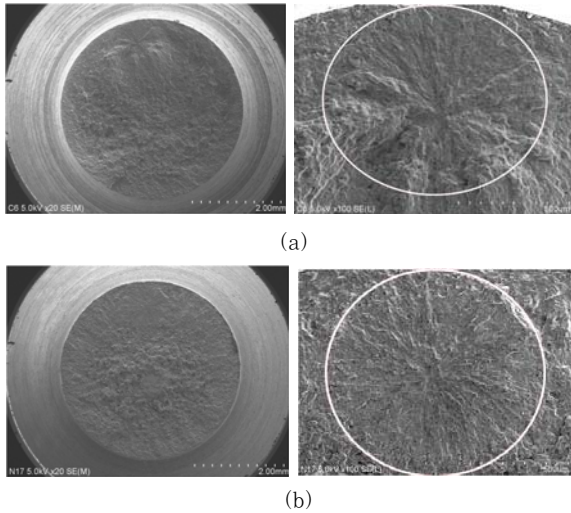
(a) Fractured surface of carburized SCM435 specimen including a fish eye crack, (b) Fractured surface of nitrided SCM435 specimen including a fish eye crack
